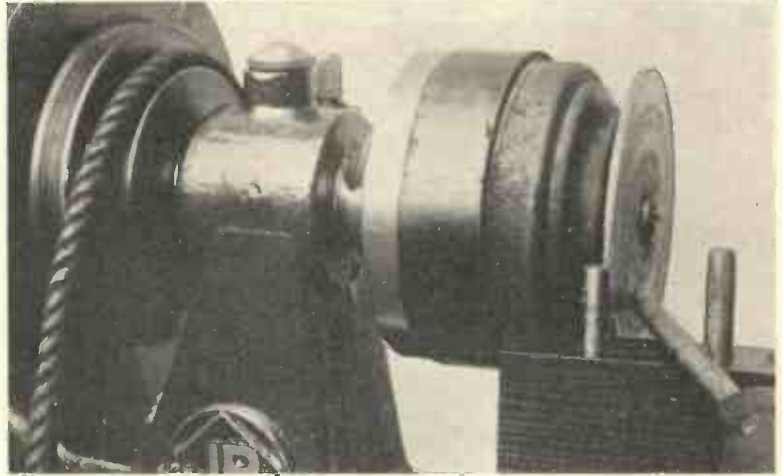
SPINNING ALUMINIUM IN THE LATHE.
